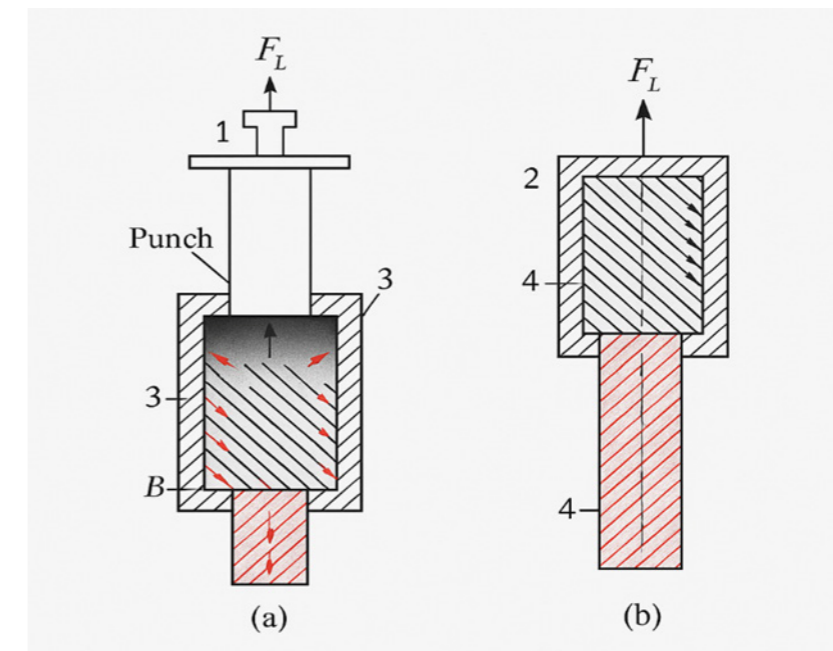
Schematic structure of metal extrusion in a die: a – RP50 press; b – extrudate
